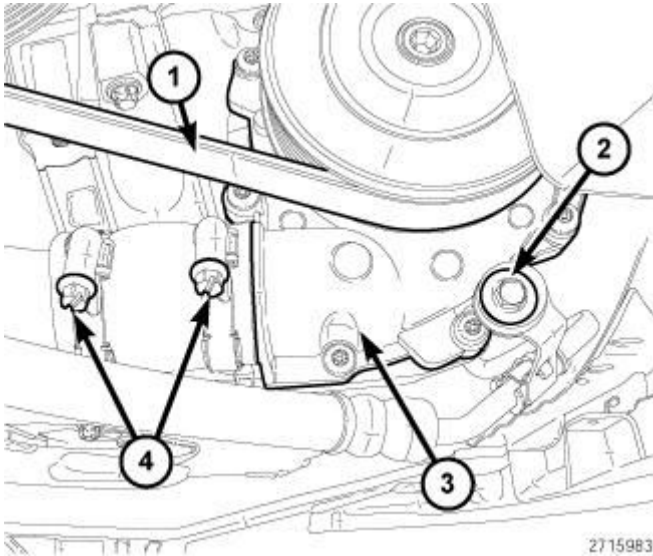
Power Steering Pressure Line Retaining Bracket Bolt
